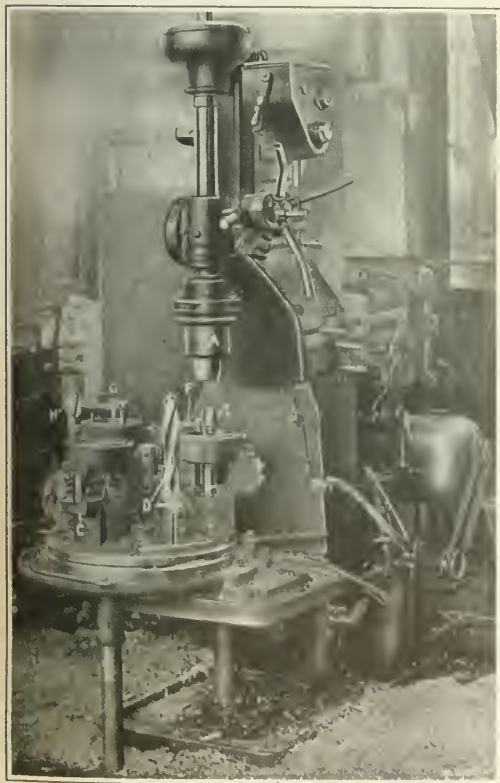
Machining Hole and Nose of Shell Blank in Barnes Drilling Machine
